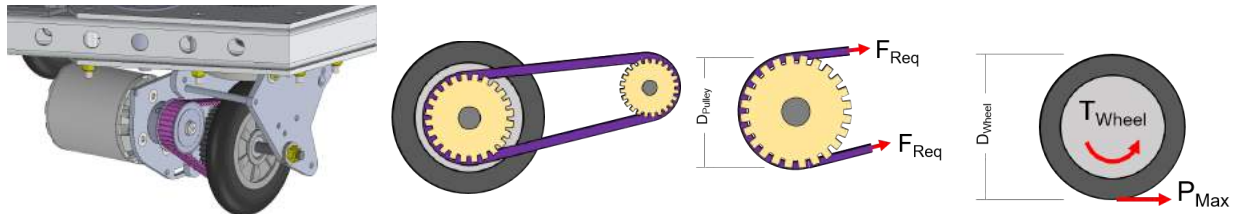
View of Drive Pulley (Left) and Diagrams of Pulley-Wheel Interfaces Components Removed From View for Clarity.
